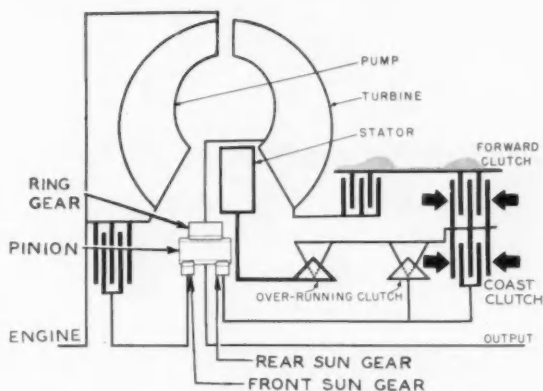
Low range is similar to first gear of drive range except that the coast clutch is applied for downhill engine braking.
